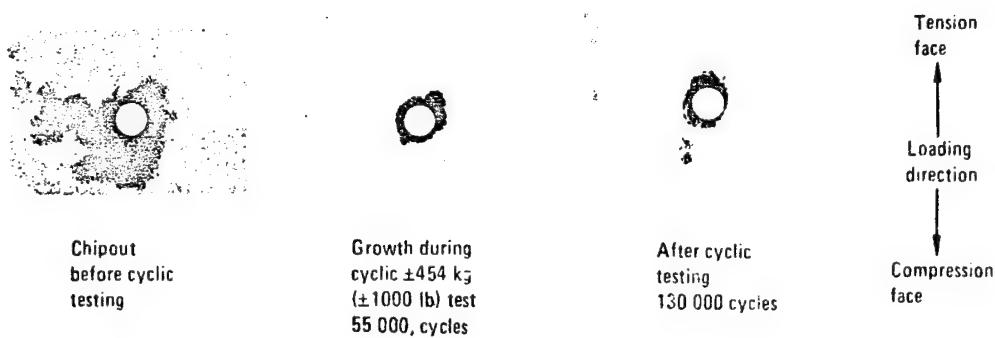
Photopositives of DIB enhanced radiographs of chipout defective specimen, I-69, before, during, and after cyclic pin bearing testing.
